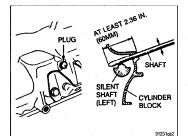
Checking the rear silent shaft for proper positioning—1.8L and 2.0L SOHC engines
